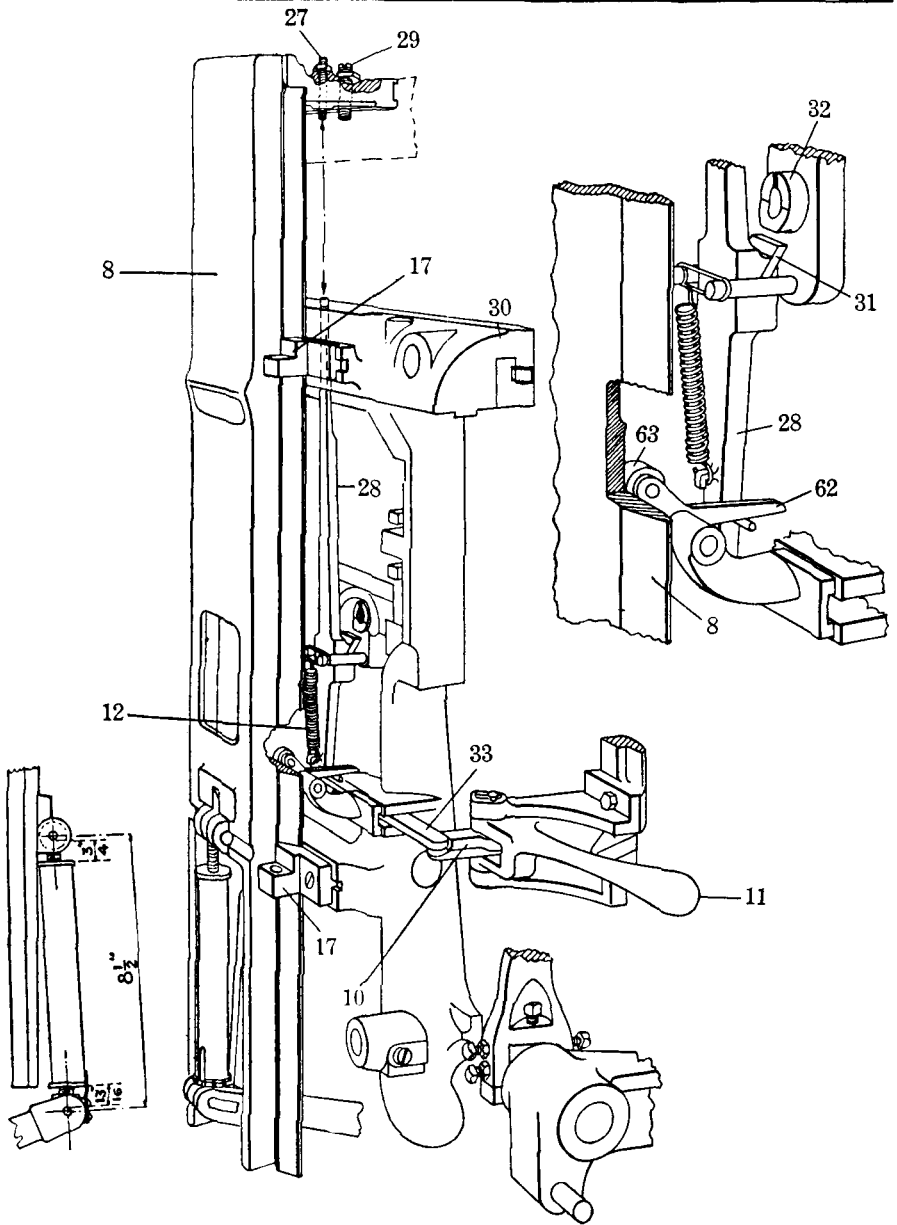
View of the first elevator and its connection; also view of stop screw and adjusting screw for the automatic stop rod, showing the vise automatic mold disk dog 32 just passing over the lip 31 on the automatic stop rod.
